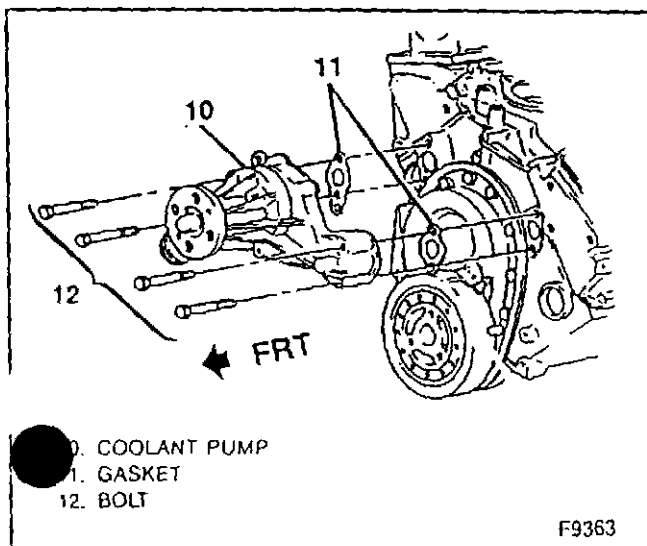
Coolant Pump (5.0L and 5.7L Engines)
